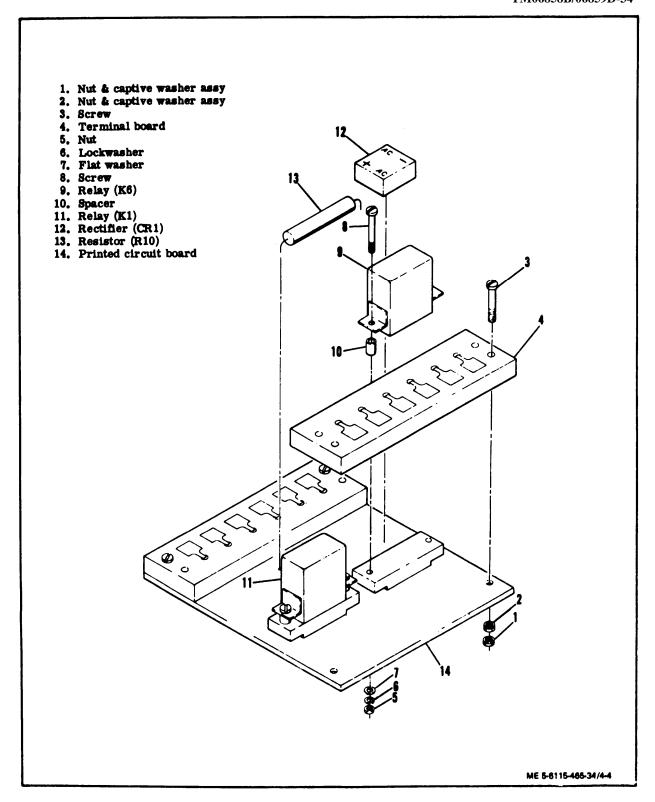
Control Cubicle Relay Assembly, Exploded View
